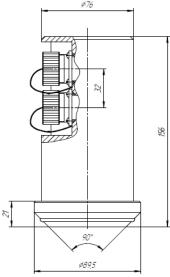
TP-140D(MA) Transducer Pressure adjusted dimensions
